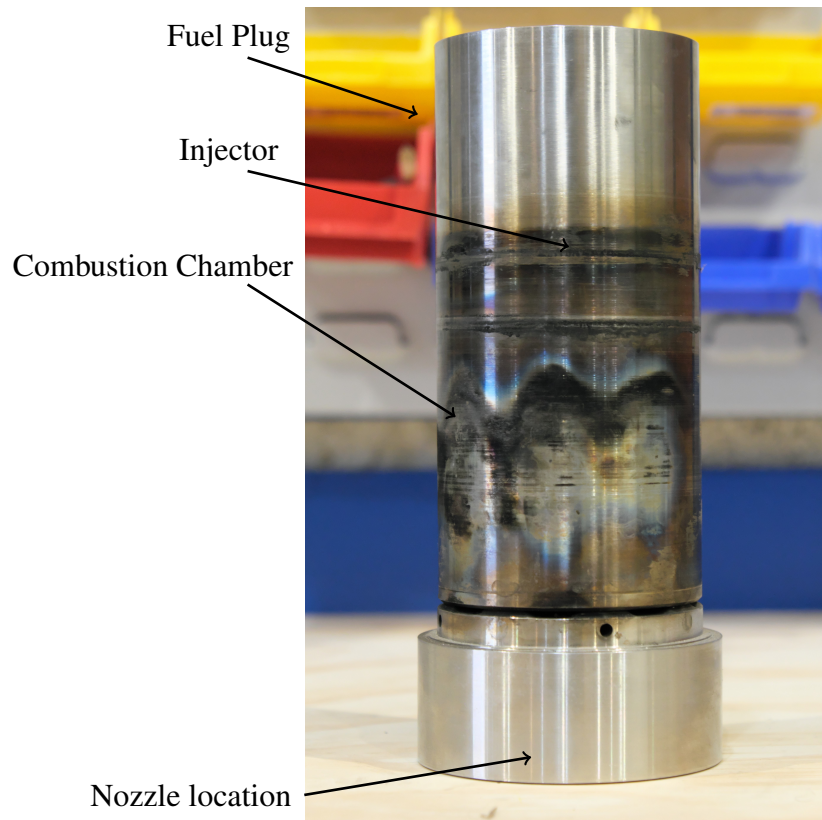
Exterior view of the Ouroboros-2 combustion chamber and fuselage plug post hot-fire testing.
